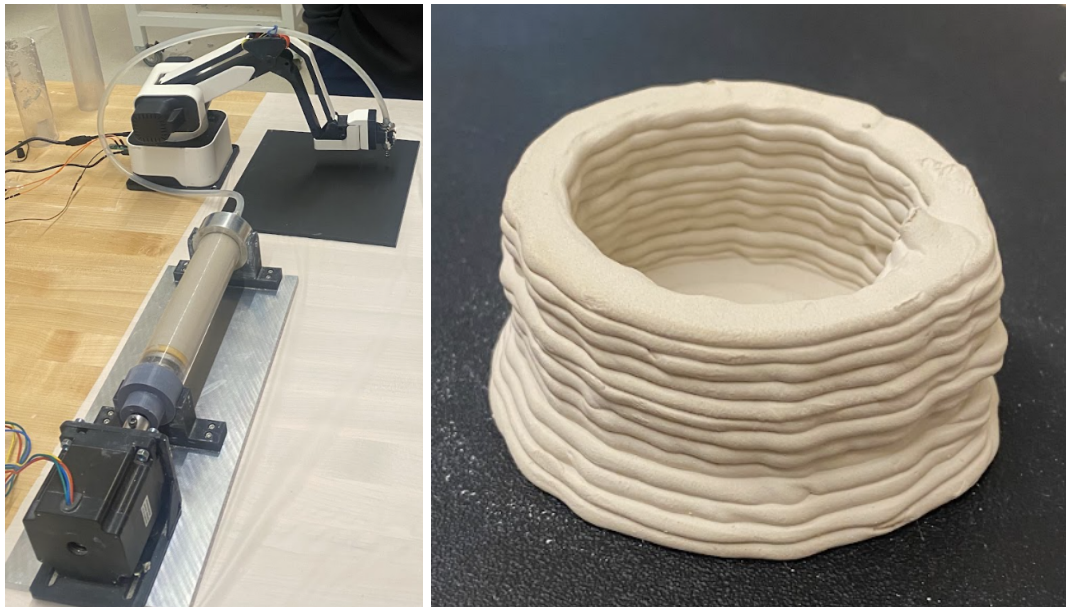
Completed Device [Left] and a Printed Bowl [Right]
